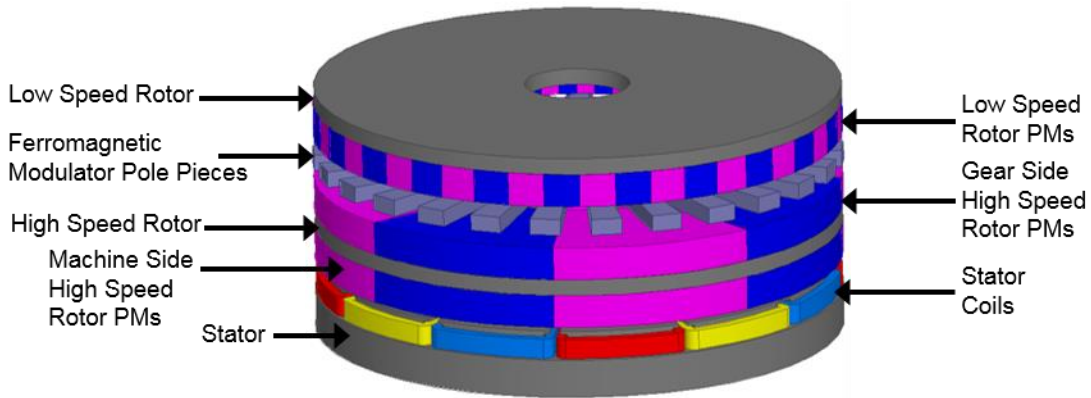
Series Connected Axial Flux Magnetically Geared Machine
